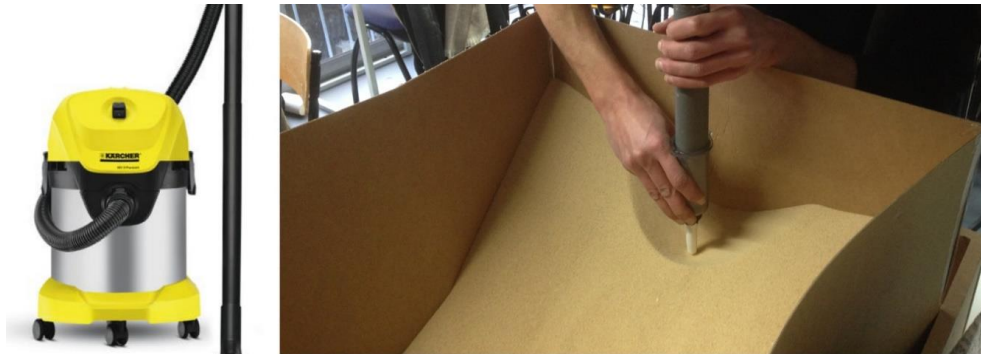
A vacuum machine is used for removing sand in the subtraction method of formation
